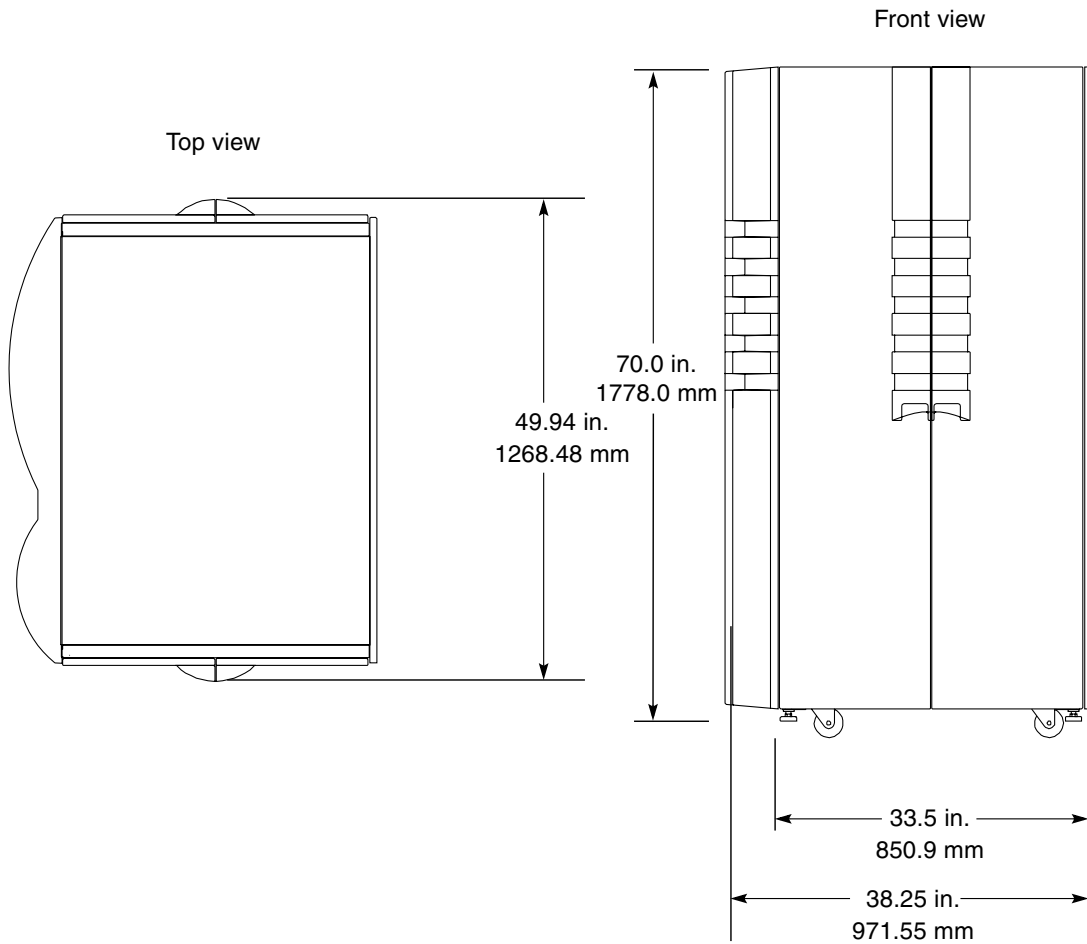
Sun Enterprise 10000 System Cabinet Dimensions—Top and Front Views
